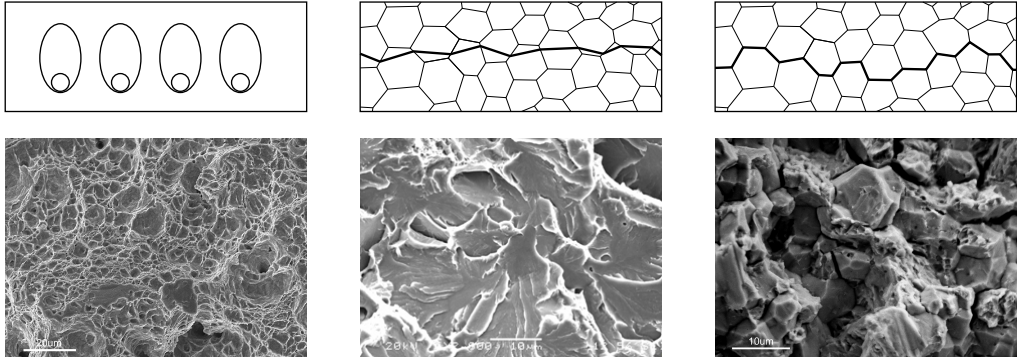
Schematic illustration and SEM of fracture surface. Left: Ductile fracture [22]. Centre: Cleavage fracture [23]. Right: Intergranular fracture [22]
